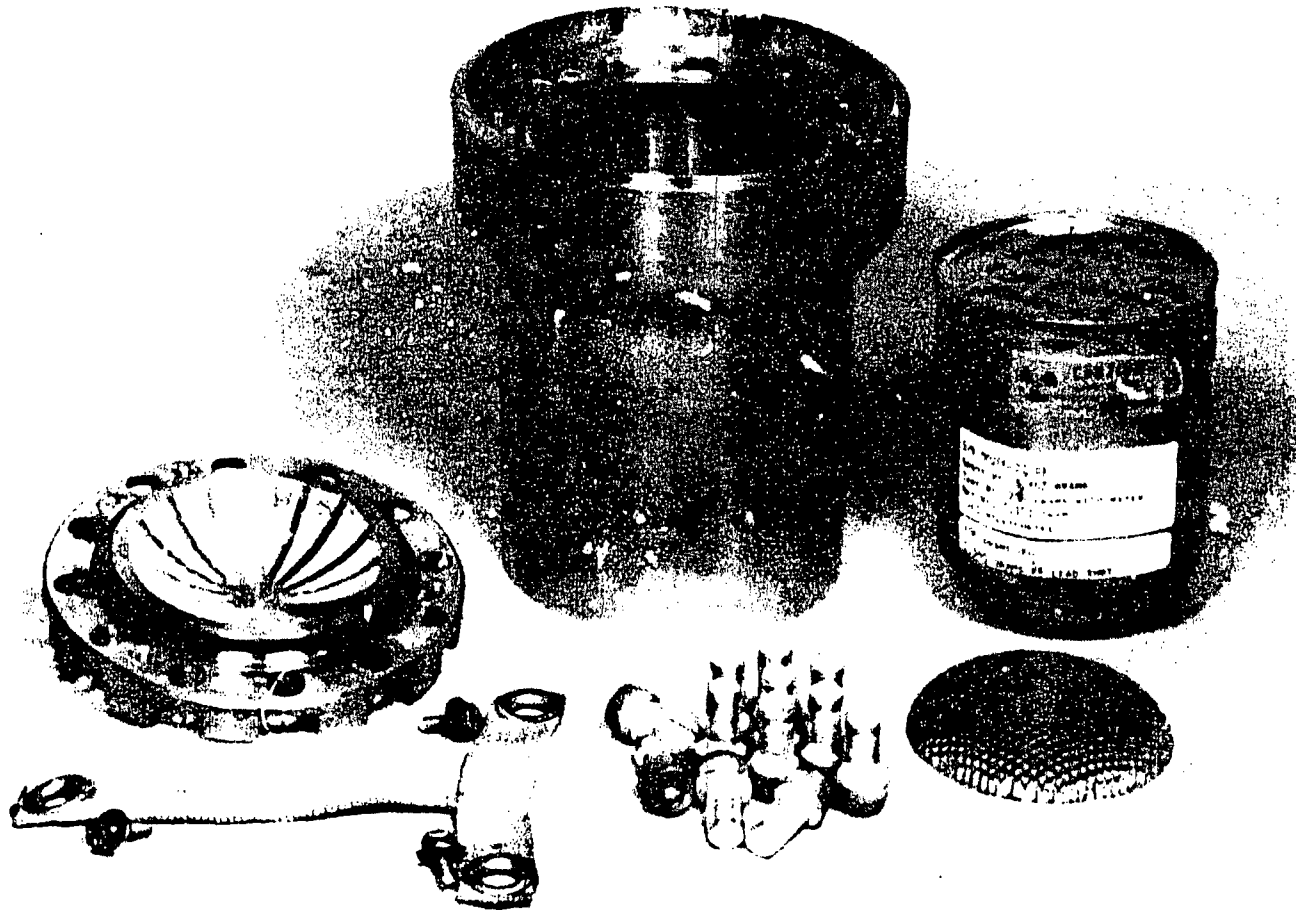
Disassembled TB-1 Containment Vessel Following 10 CFR Part 71 Appendix B Tests
